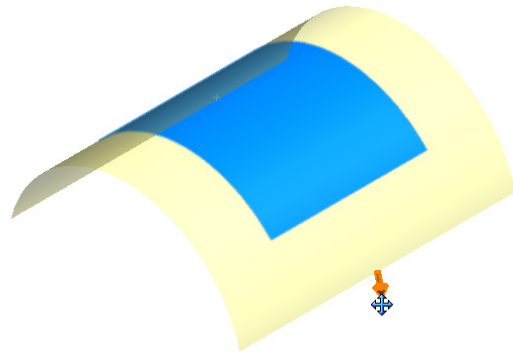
Preview of the extended surface with the Same surface radio button selected
